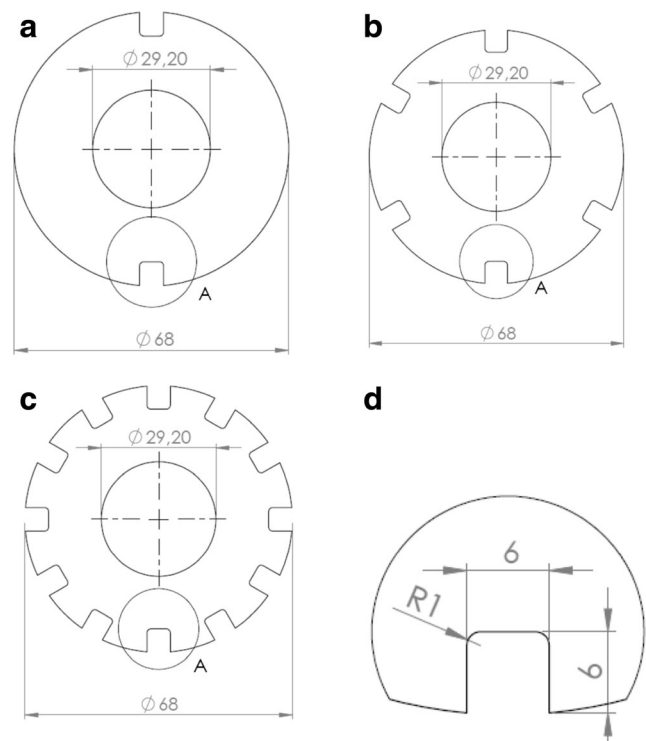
Geometry of samples of AISI 4340 with interrupted surfaces. a Two grooves. b Six grooves. c Twelve grooves. d Dimensions of the groove
